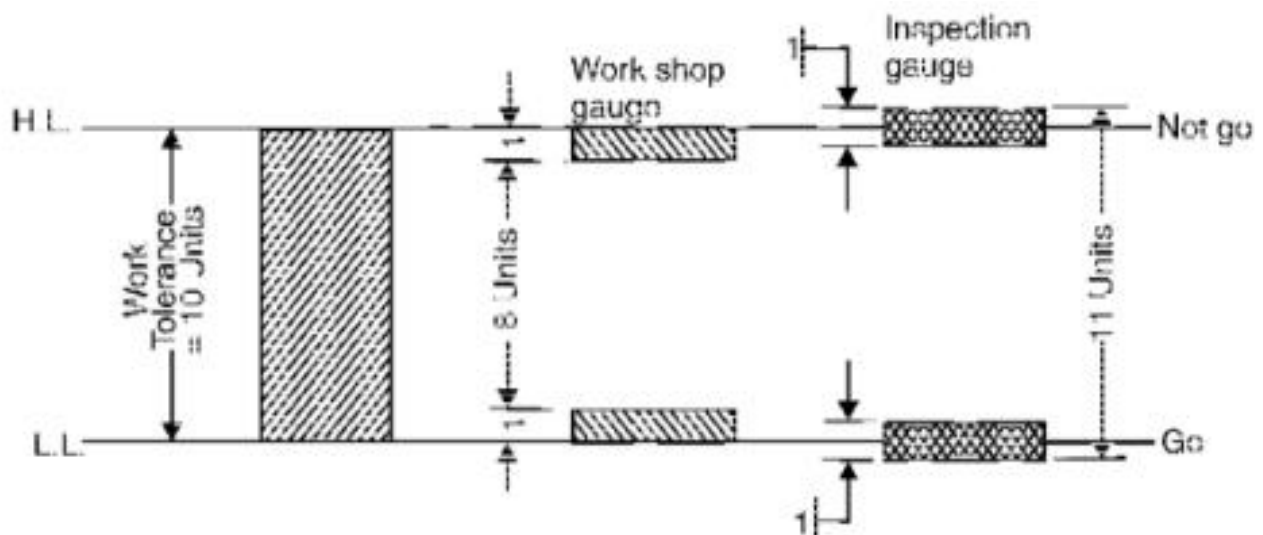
Tolerances of Workshop and Inspection Gauges (Revised).
